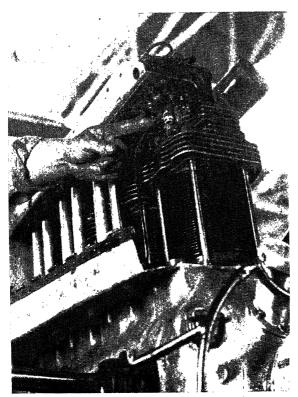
When removing oil feed fipes to valve covers MAKE SURE METERING PLUGS ARE NOT DAMAGED ("GIPSY II"). (SEE ALSO FIG. 19).
